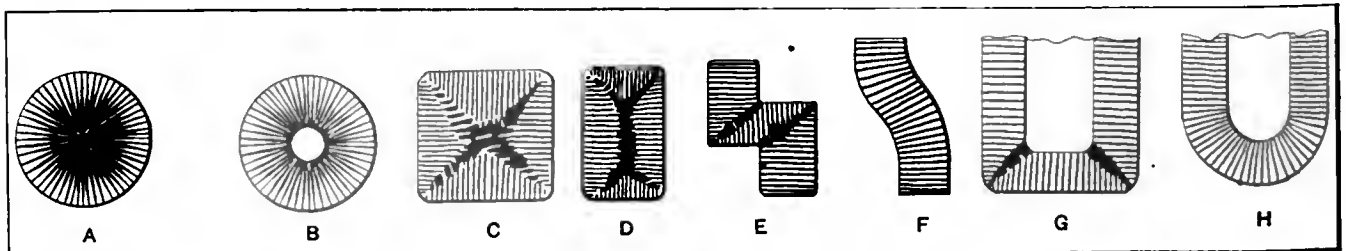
Sections of cast gray iron showing how defects will be found at the cores of the thickest sections in each example
